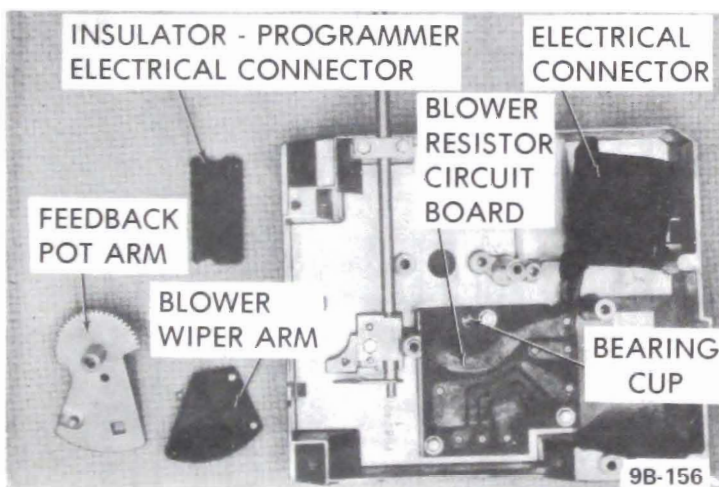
B-241 Blower Wiper Arm and Feedback Pot Arm - Removed
